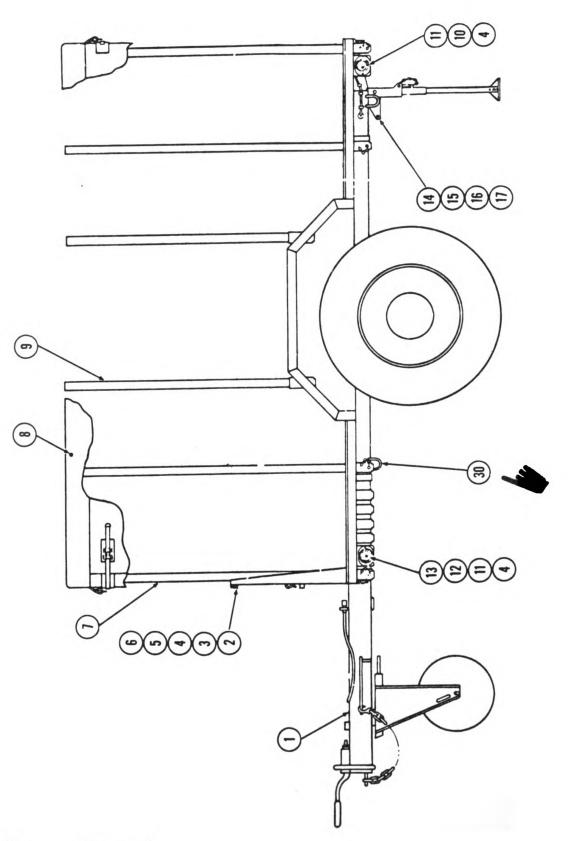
Trailer, Side, Top and Rear Views (Sheet 1 of 3)
